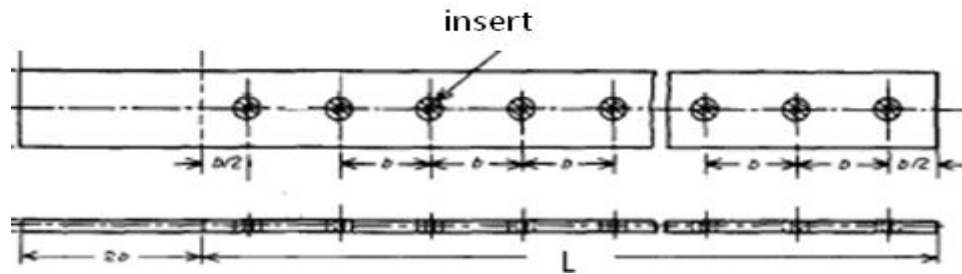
Schematic layout of specimen ($b=35$ mm, $L=350$ mm)
